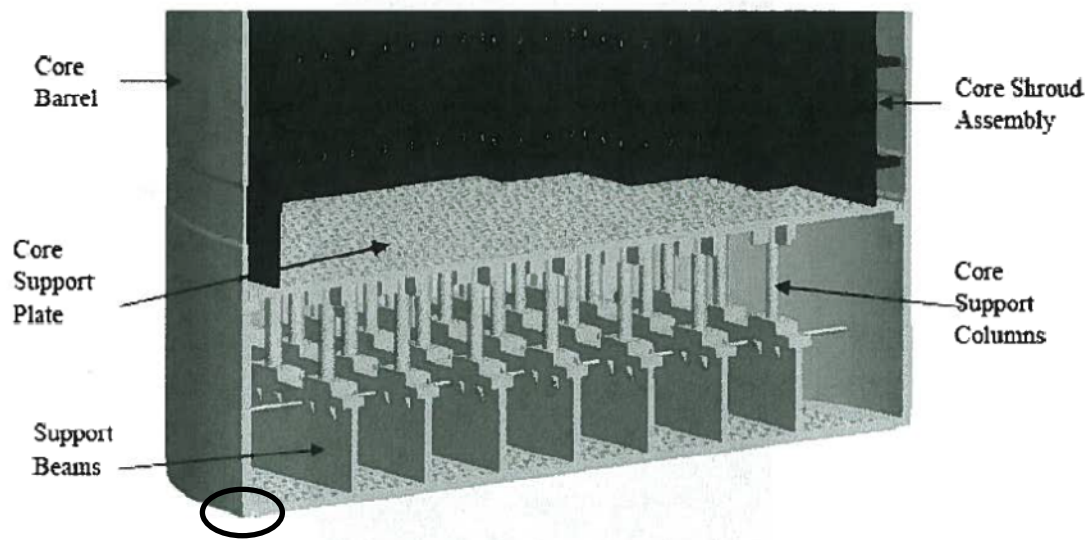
Figure B – PNP Lower Core Support Structure – Oval shows presumed location of weld
